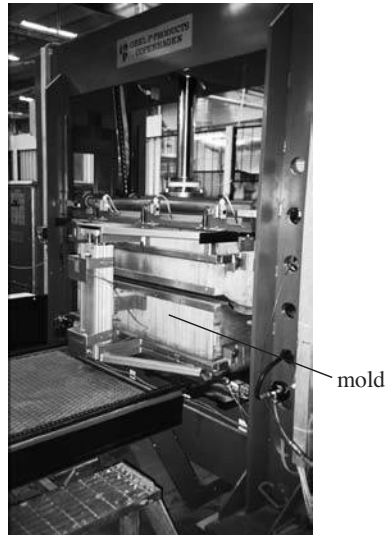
Wood in the mold after bending in the 80-ton press.
